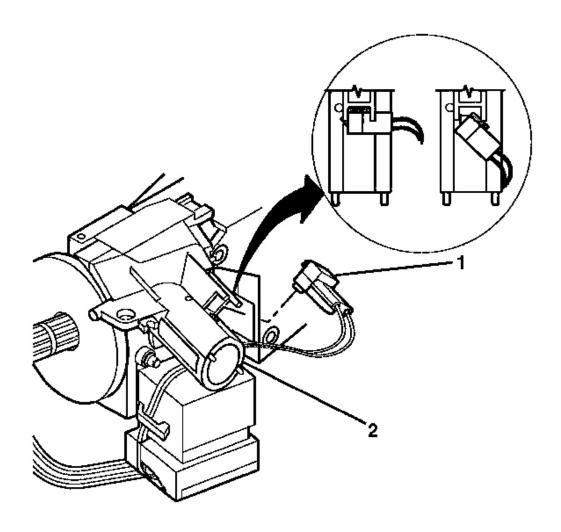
Identifying Key Alarm Connector At Ignition Lock Cylinder Case Courtesy of GENERAL MOTORS CORP.
